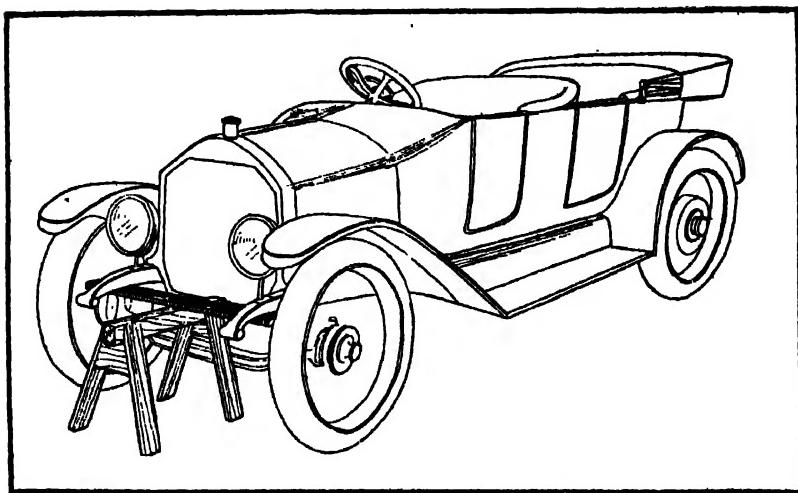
Outlining Method of Supporting Front End of Motor Car Frame When It is Desired to Remove Either Front Springs or Front Axle.
